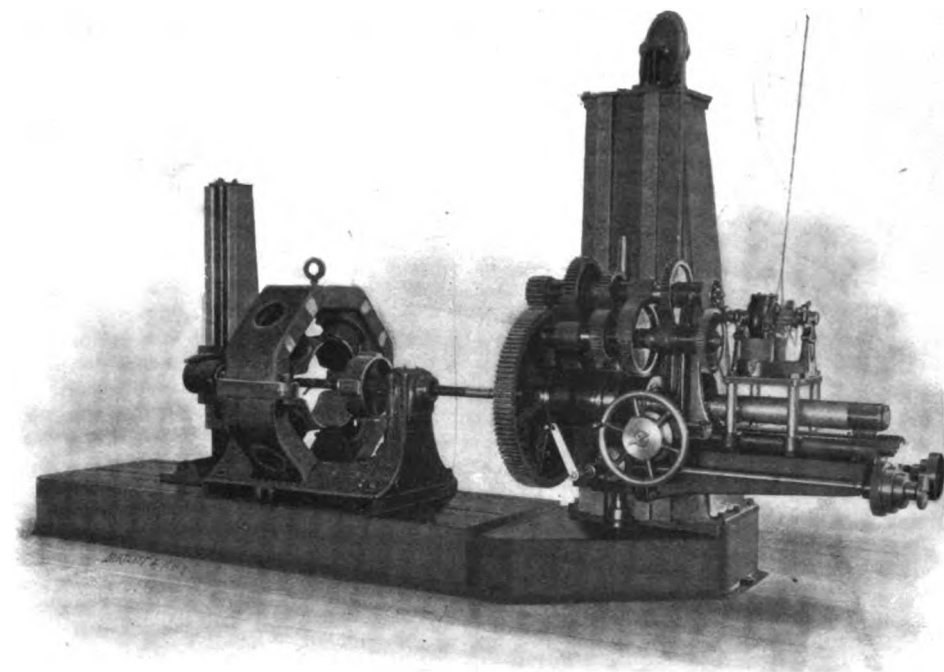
MOTOR BUILT ON BORING HEAD, SUPPLYING POWER TO 10-TON BORING MILL.
